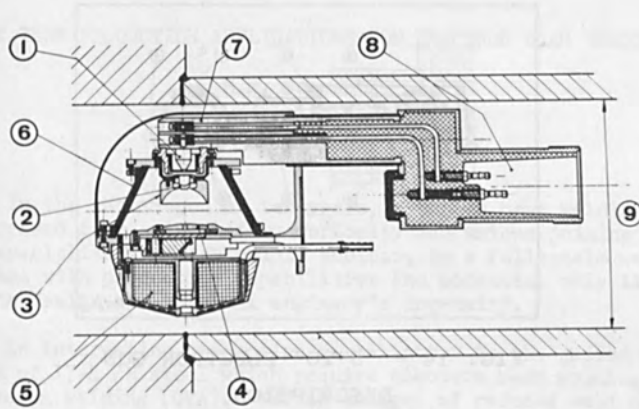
ARRANGEMENT AND TEST-WELD
